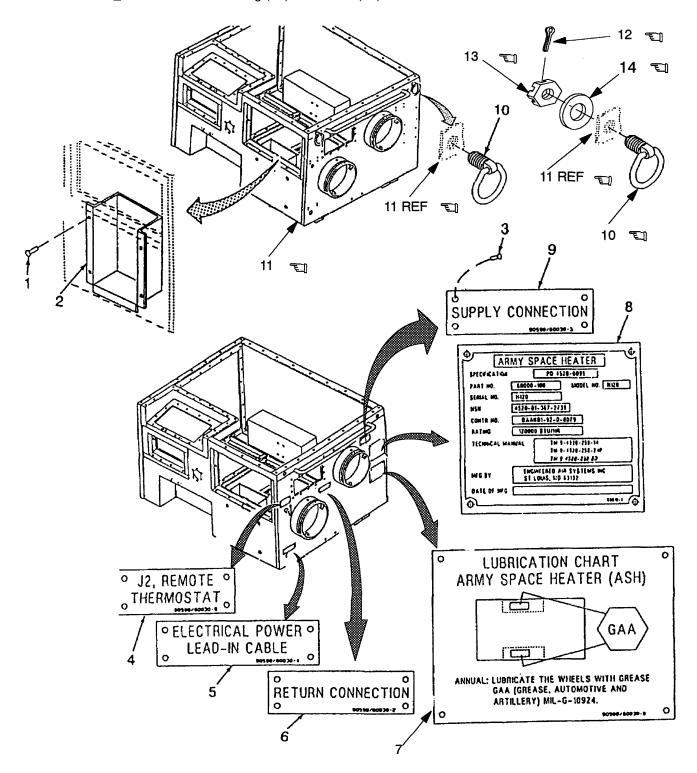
Frame Assembly Disassembly (Sheet 1 of 2)
